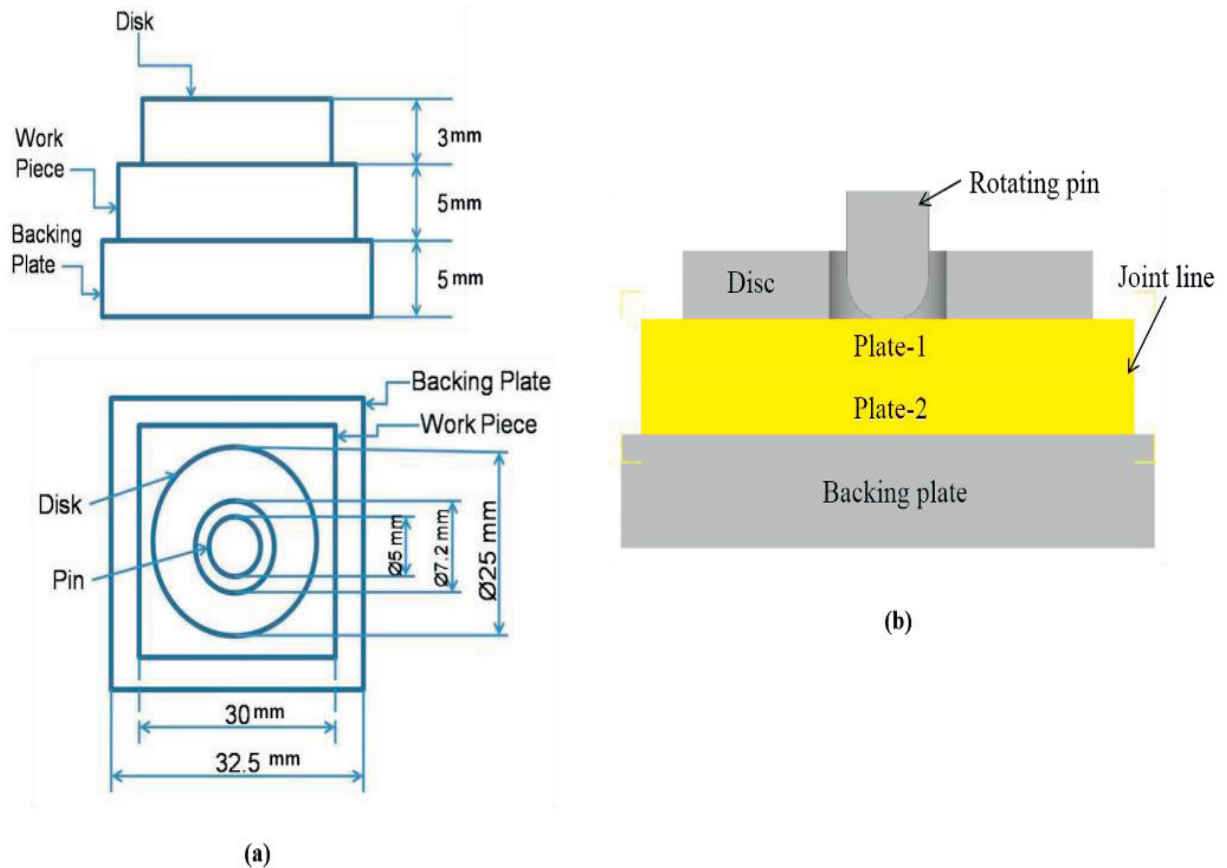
(a) Initial assembled stage of components with dimensions, (b) Section view (DEFORM-3D Image)
